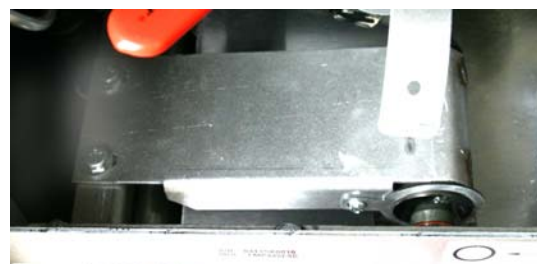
The left shield is shown resting in place in this view below the burners. The shield rests on the gas manifold. The bracket on the shield attaches to the flange shown with an arrow and to Tinnerman clips attached to an existing bracket, also shown with an arrow. 35-Series fryers require an additional bracket to attach the shield. See instructions and photos on page 3.
